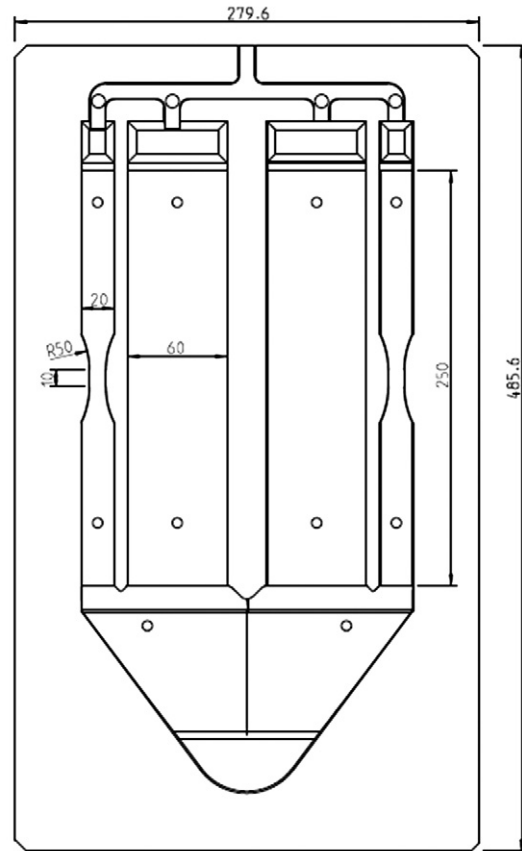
Directly cast flat tensile specimen for fatigue tests, thickness = 6 mm.
